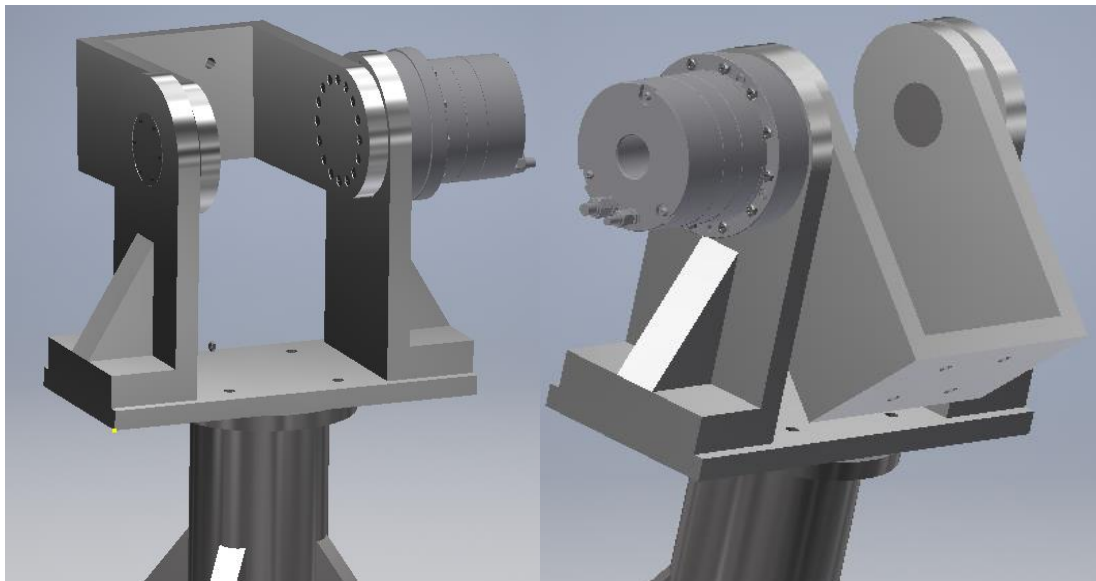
View of cradle and SHA actuator assembly at 90° (left) and motor view side (right).
